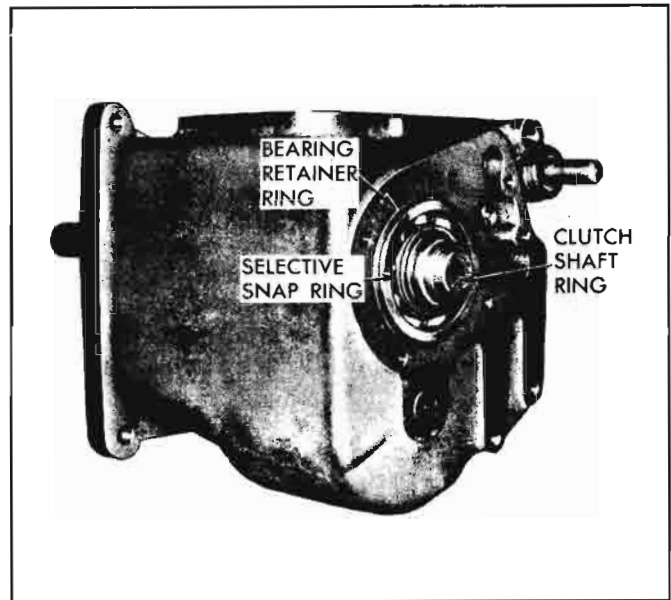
D-32—Clutch Gear and Bearing Snap Rings
